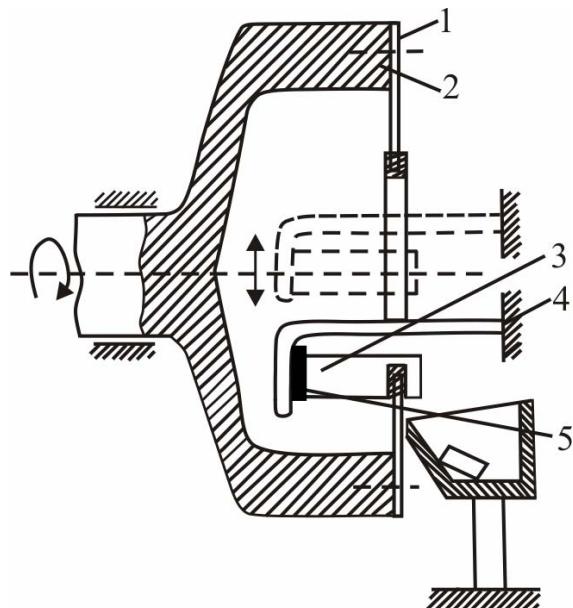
Cutting by diamond disc with the inner cutting blade:
